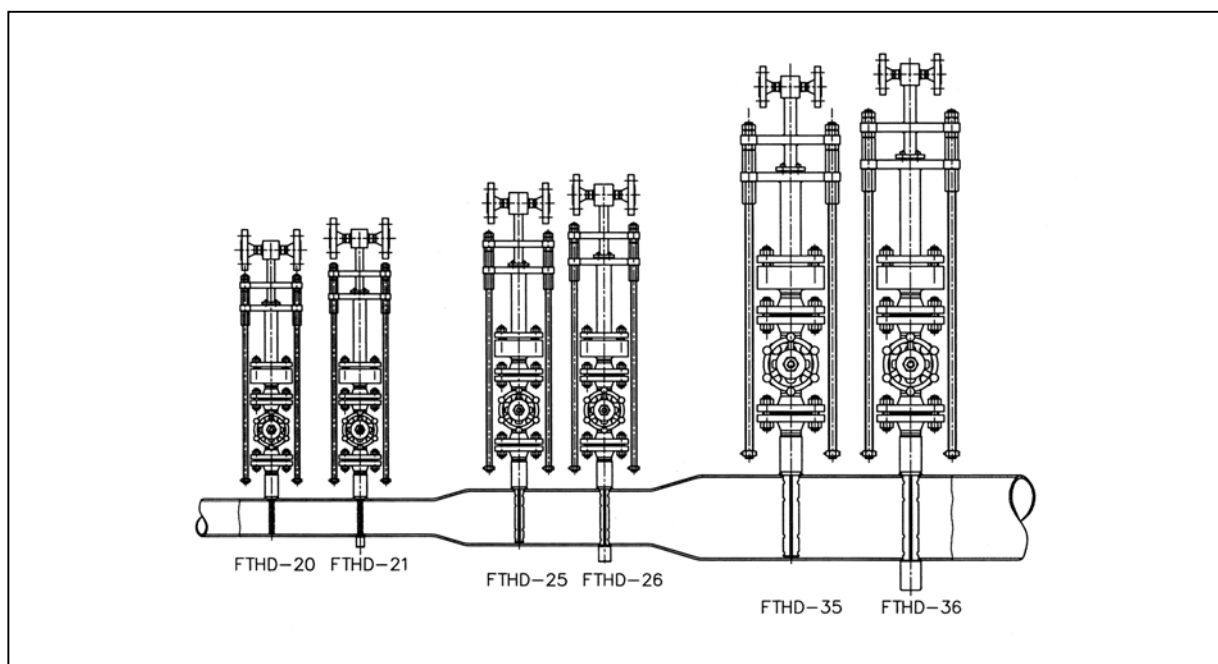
Pitot tube sensor FTHD-36, shown in a horizontal installation for horizontal or vertical pipe runs.
